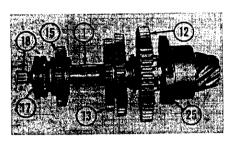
Removed spline shaft showing gears and pilot bearing (18). Refer to Fig. 108 or 109 for legend.
